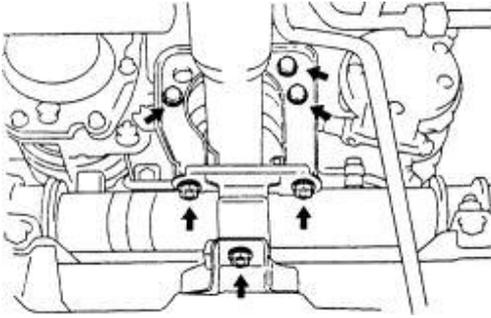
Remove these bolts and nuts to extract the No. 2 equipment drive housing insulator and No. 3 housing stay
